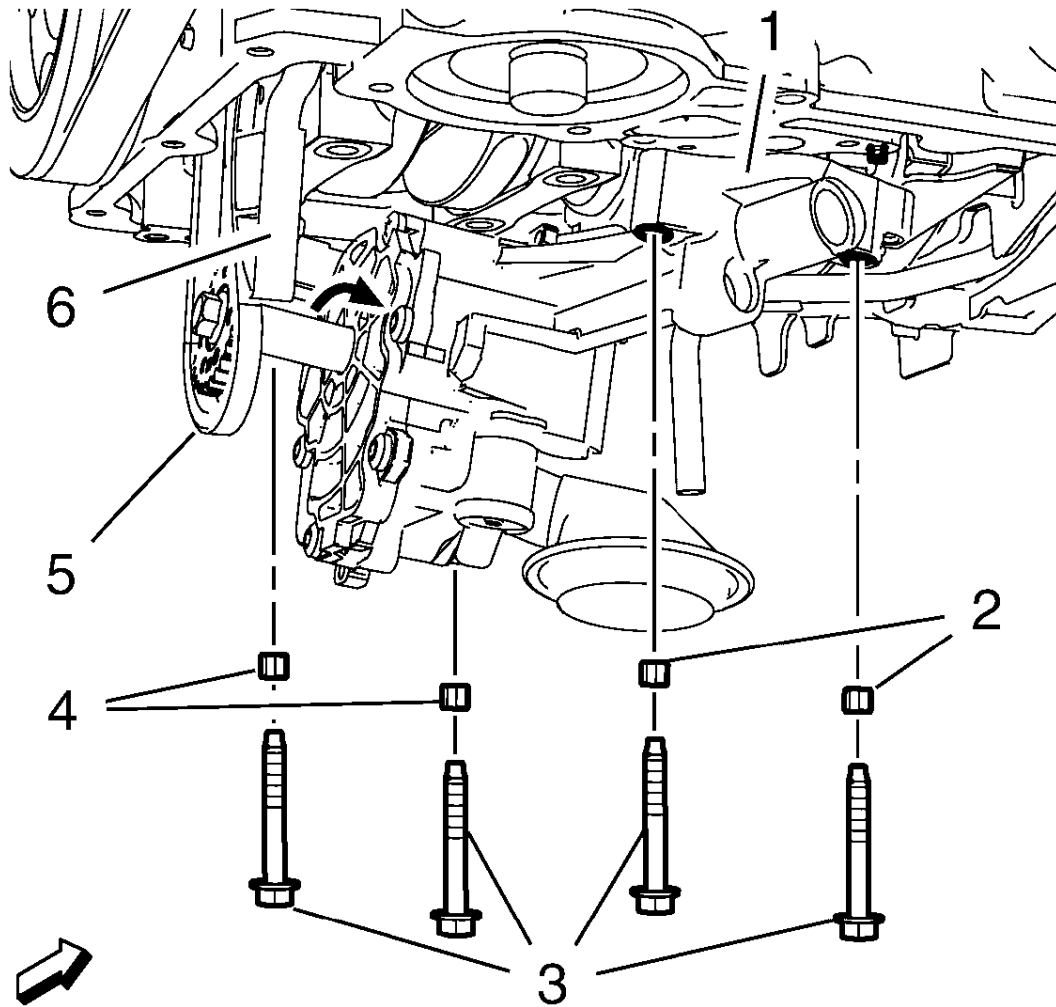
Oil Pump, Bolts, Retainers, Oil Pump Drive Chain And Tensioner
